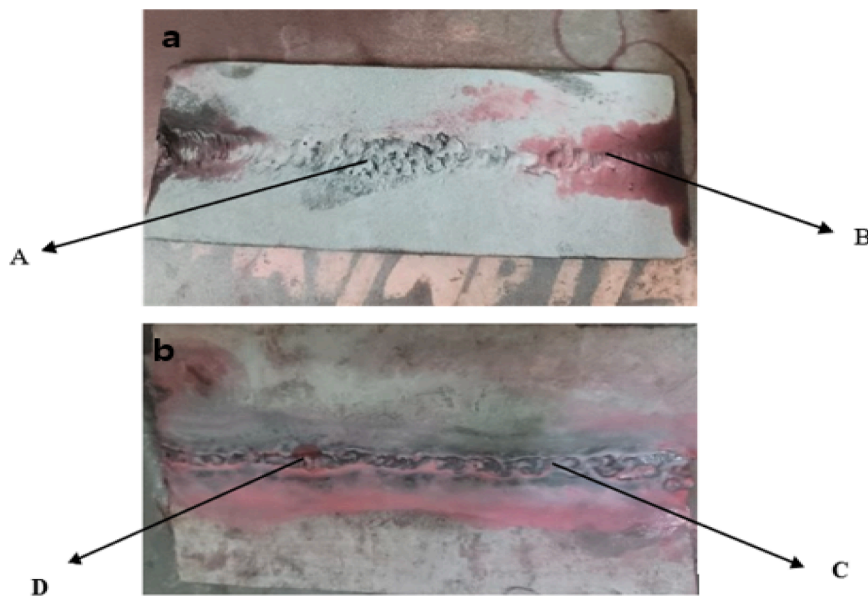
Images showing results of (a) acetylene weld dye penetrant test (b) oxy-hydrogen weld dye penetrant test.
